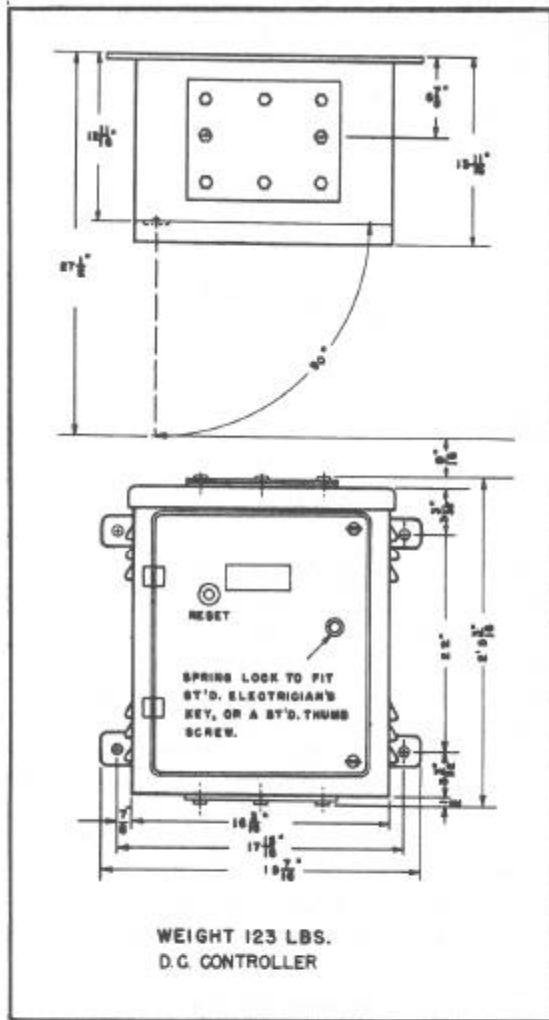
Outline Drawing of D.C. Magnetic Controller
